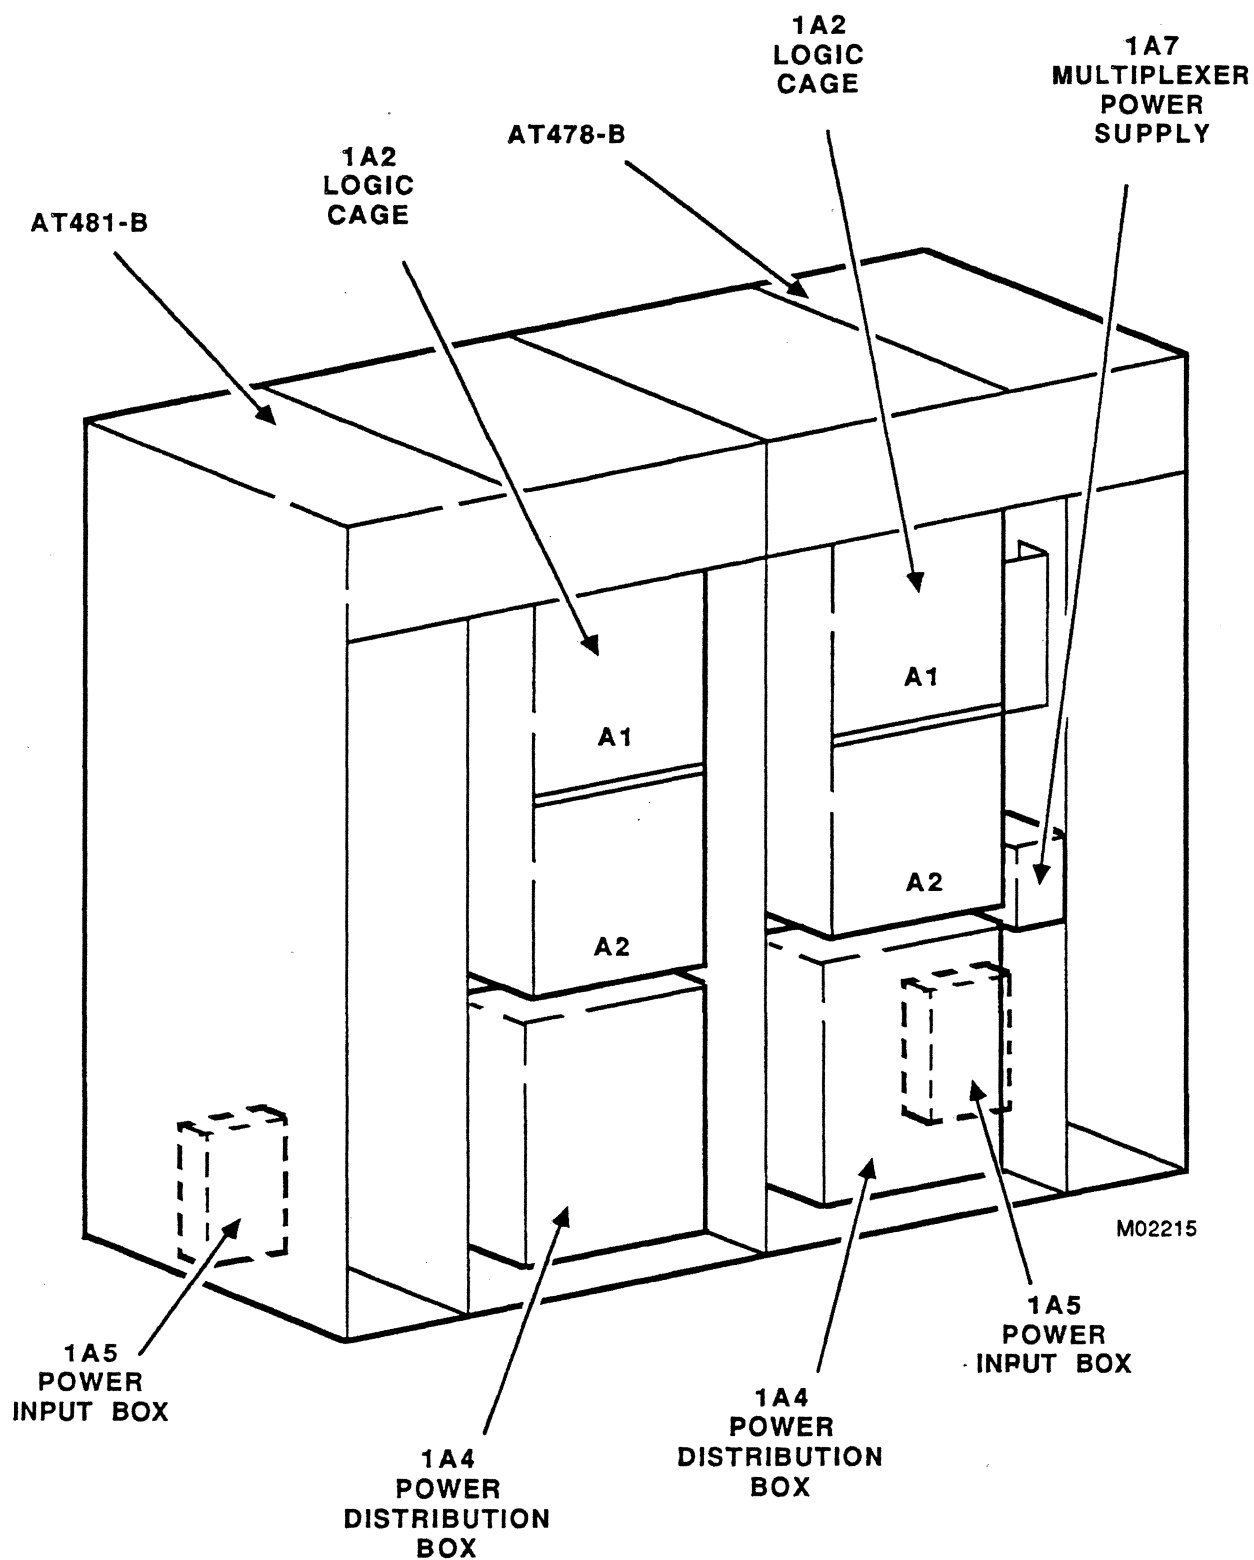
Cabinet Front View, Selected Assembly Locator
